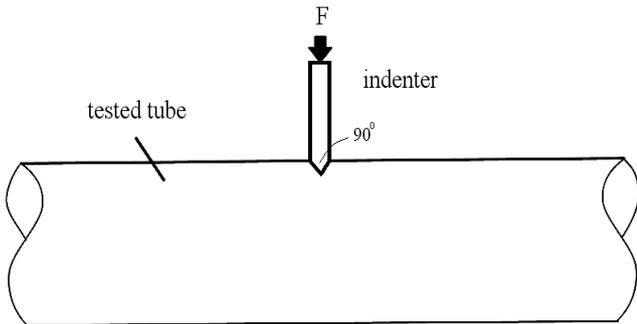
A schematic drawing of processing a sharp dent on the 6061-T6 aluminum alloy tube
